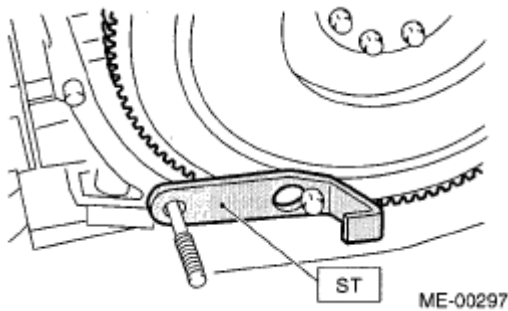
Locking Crankshaft Using Crankshaft Stopper ST498497100 - MT Model
